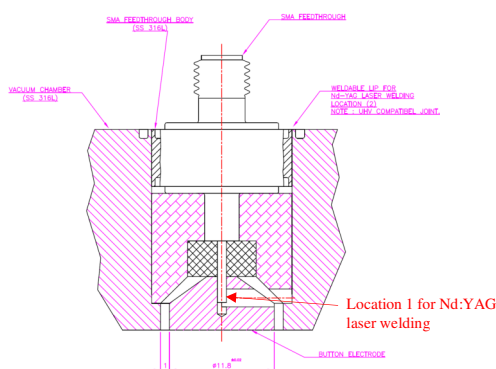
A schematic of SMA feedthrough along with laser welding locations '1' and '2'.
